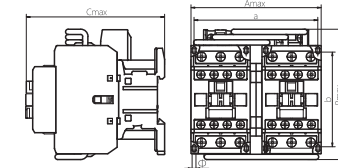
Outline and installation dimensions of NC8-09/N~38/N series AC contactors
